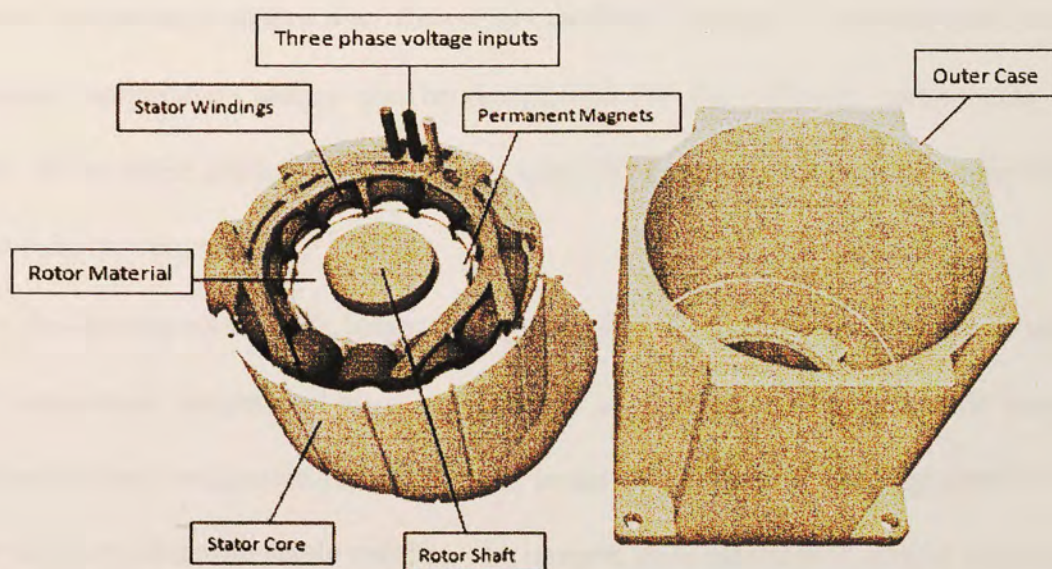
3D Model of PM Motor (left) Stator and Rotor (right) Motor Casing
